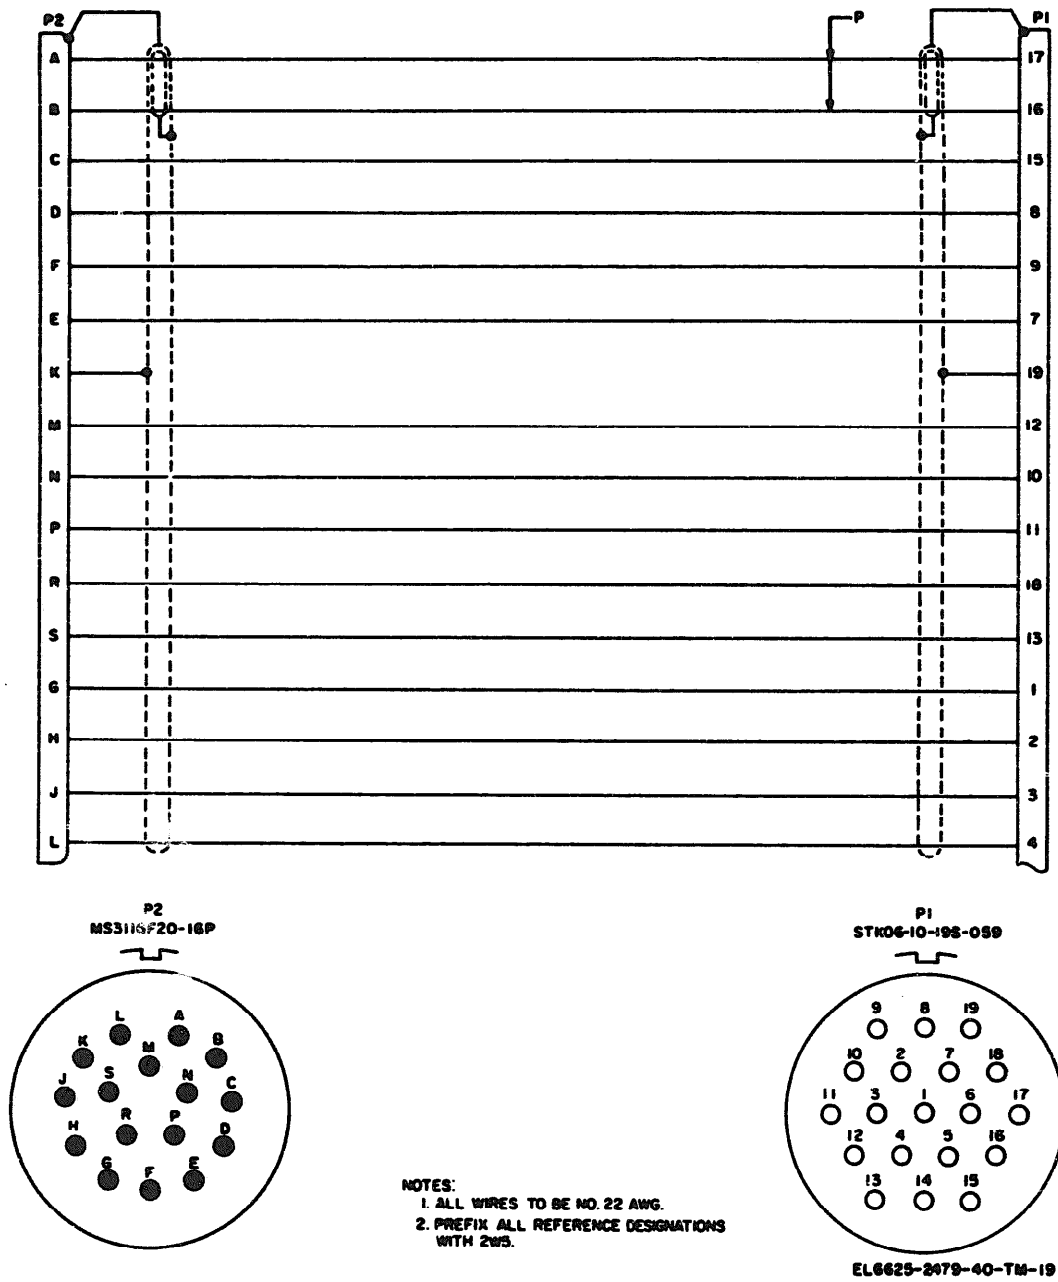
Cable Assembly, Special Purpose, Electrical CS-13718/AYM-8. wiring diagram.
